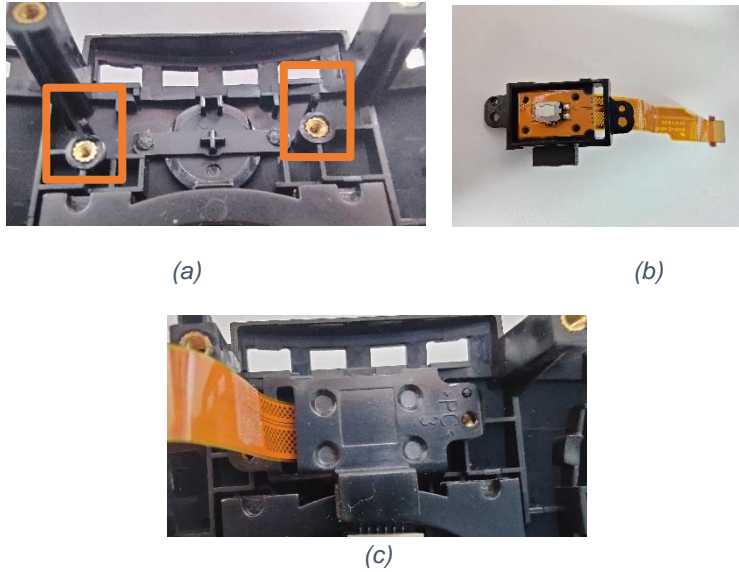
(a) Self-locating pins on Controller Lid for System button sub-assembly
